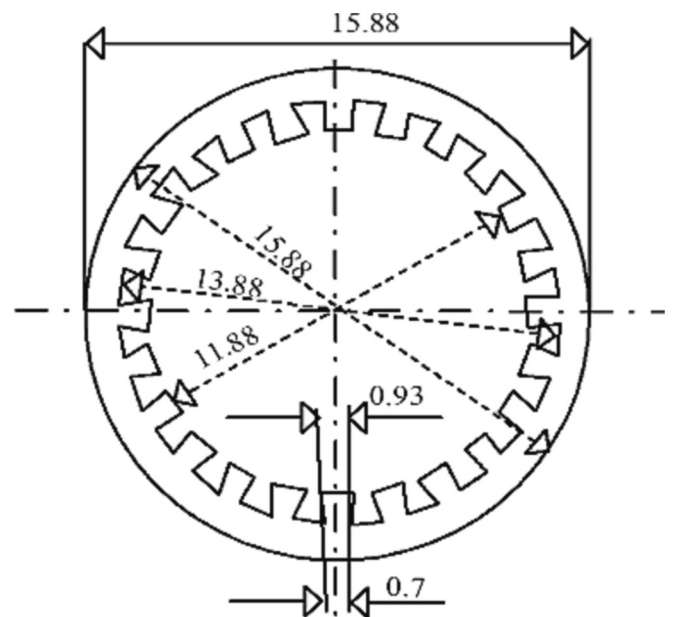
Cross-sectional dimensions of grooved heat pipe.
